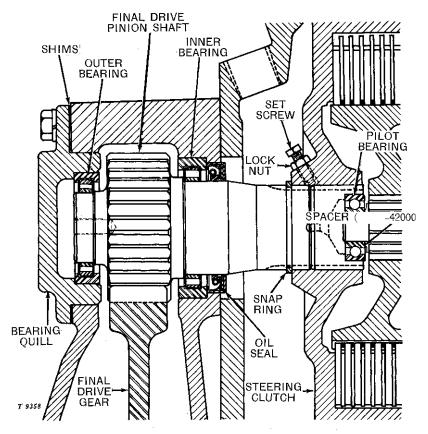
Final Drive and Pinion Shaft Installed
